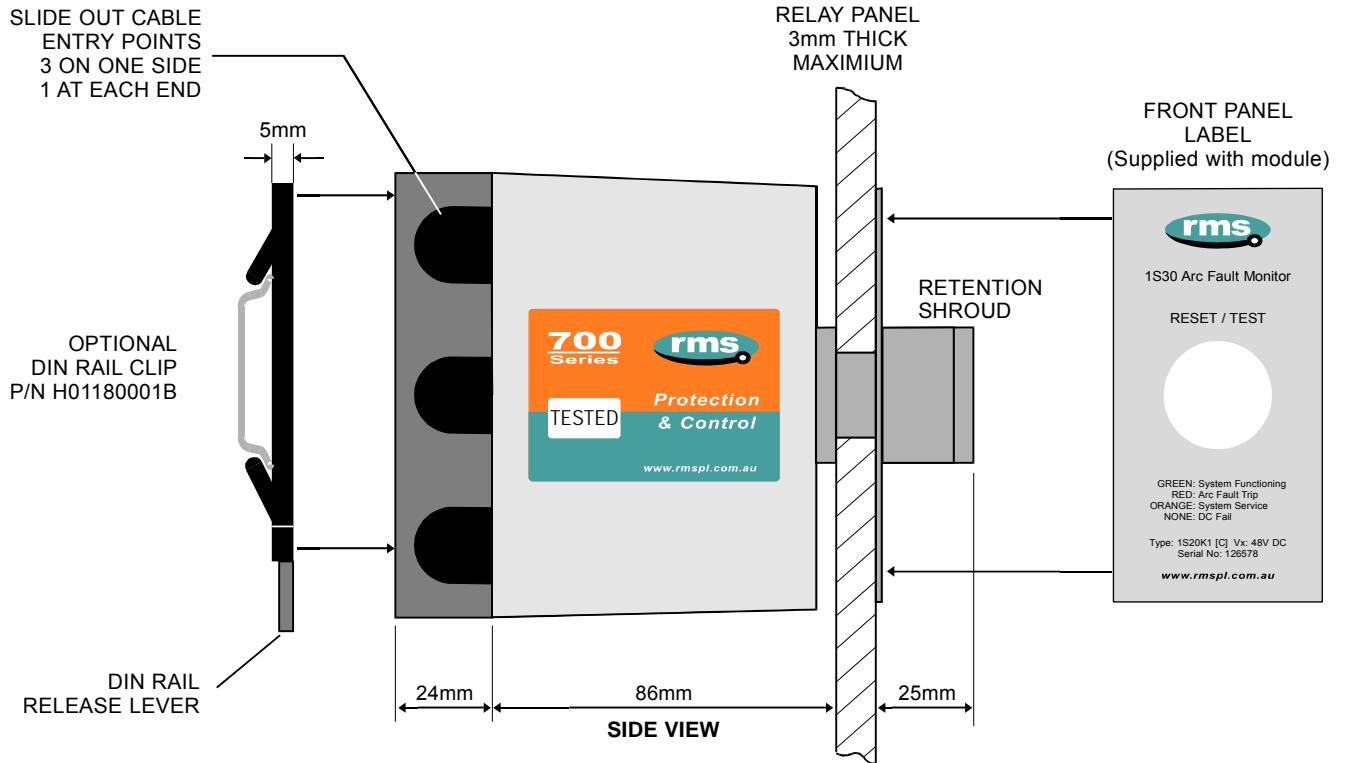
1S20 Panel mounting arrangement depicted – Optional DIN rail mounting available
